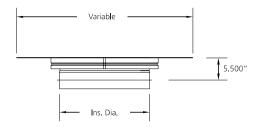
Typical installation for Starting Adapter (SA) and Staring Adapter-Drain (SAD)
